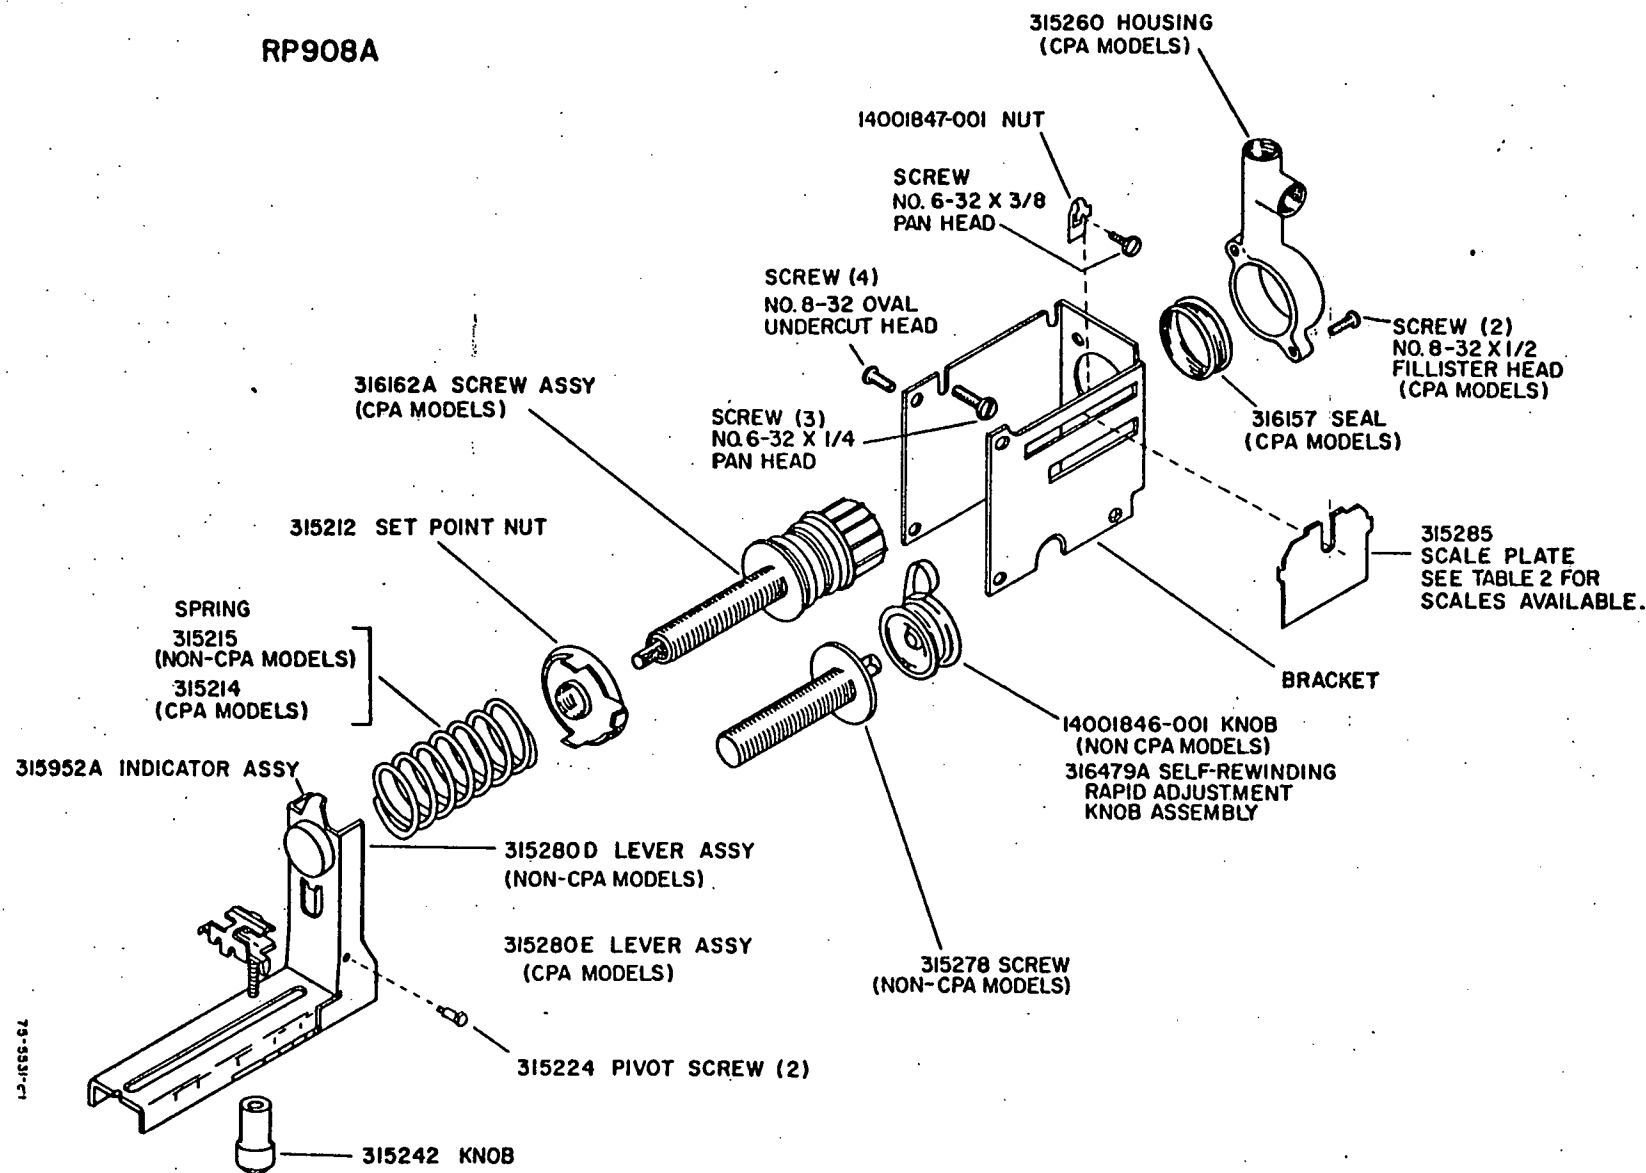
Detail of RP908A Bracket and Indicator Assembly.
